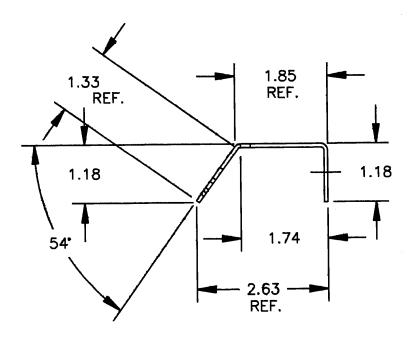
44B295864-001 Grounding Bar, Side View Dimensions
